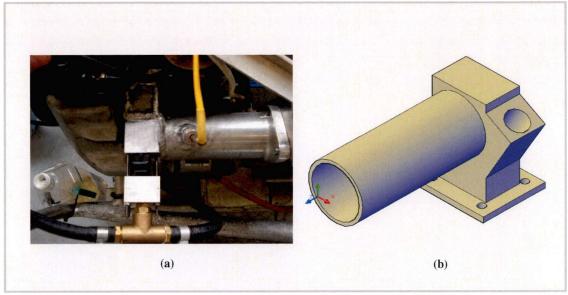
(a) Intake manifold assembly; (b) AutoCAD model of intake manifold
